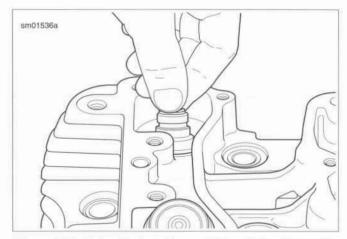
Valve Seal and Lower Valve Collar Assembly Installation
